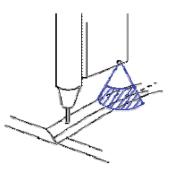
Optical System for Guiding a Weld Seam.
